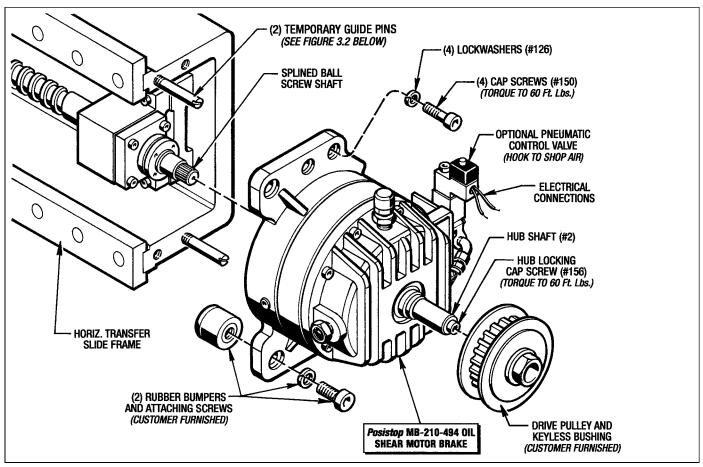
Installation (Horizontal MB-210-494 Brake Shown)
